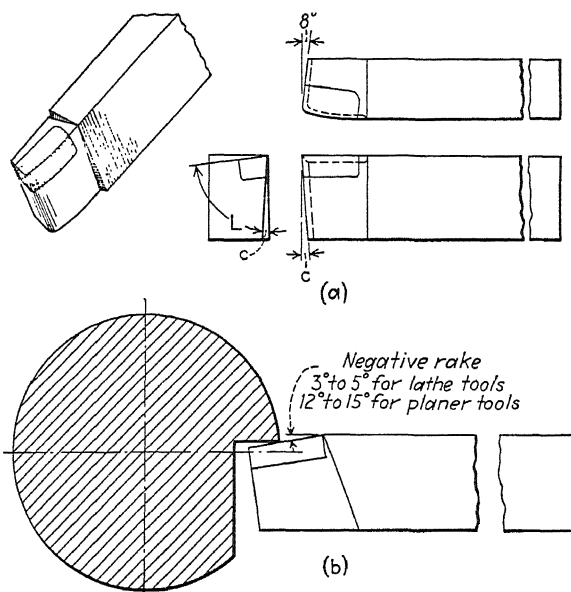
Cemented carbide-tipped tools. *a*, views of turning tool, angles marked *C* are clearance angles and *L* is the lip angle; *b*, shows how an interrupted cut in lathe work (or the beginning of a cut in shaper or planer) strikes the tool having negative rake; the impact is some distance behind the nose and is less likely to break the tip.
